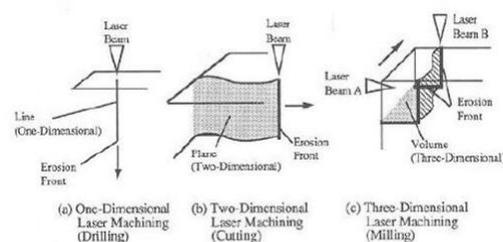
Schematic showing one, two and three dimensional laser machining [6]
